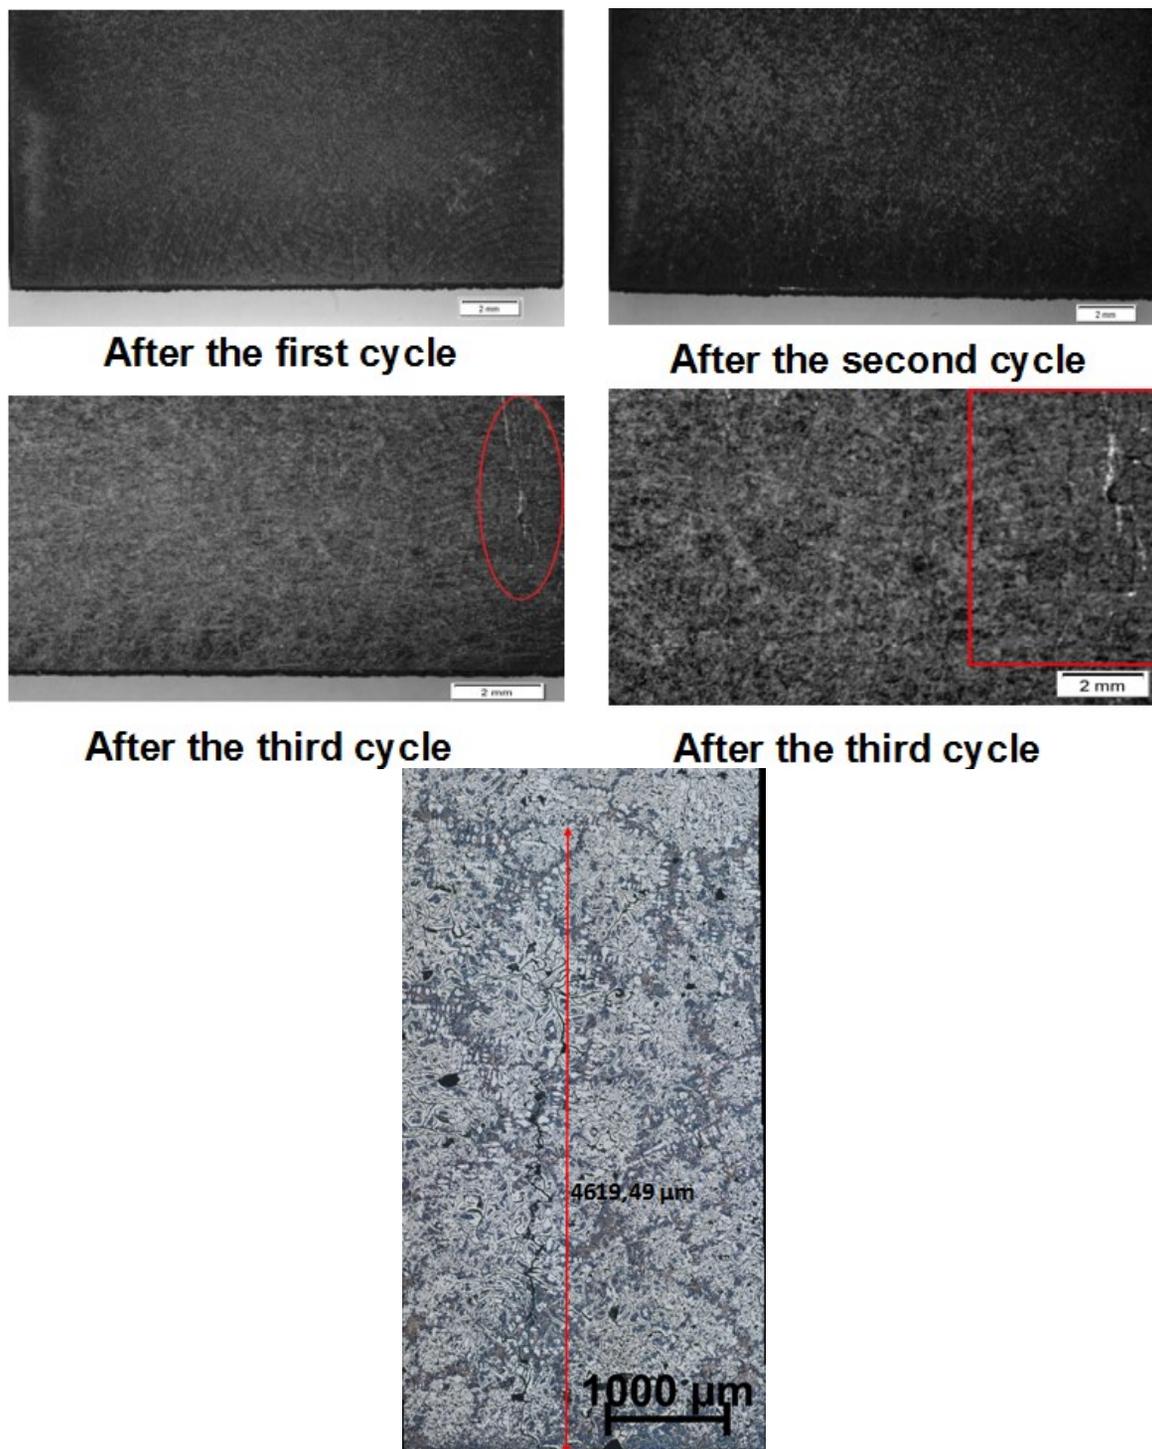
Macroscopic view of samples after cycles of test and view of microstructure with marked length of cracks- Grey cast iron
